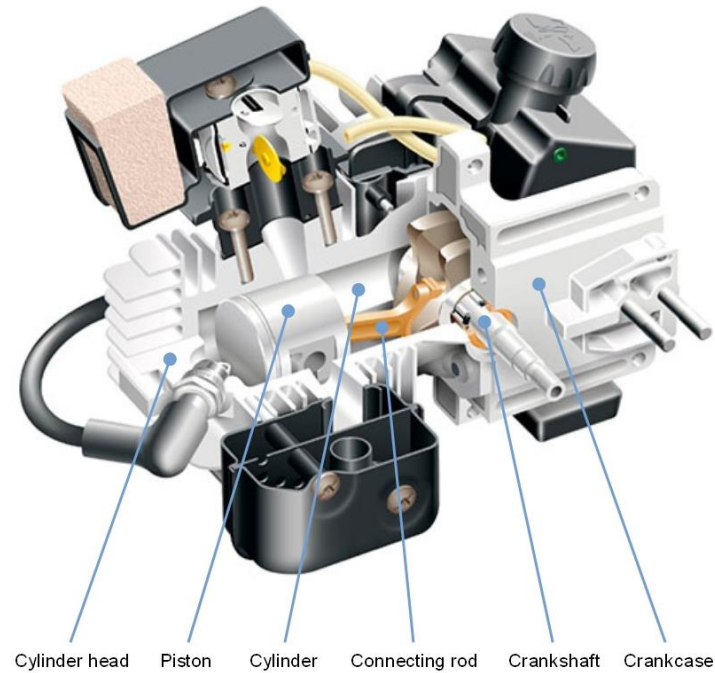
CUTAWAY DRAWING OF MCCULLOCH MAC 838S-AV TWO-STROKE, SI, CHAINSAW ENGINE. ENGINE DISPLACEMENT 38 CC, BORE 39 MM, STROKE 32 MM, MAXIMUM POWER 1.5 KW AT 12000 RPM.
